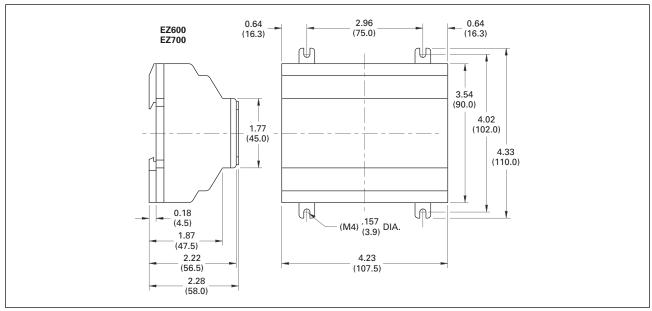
EZ600 and EZ700 Series Dimensions in Inches (mm), Drawing Number MD05013002E
